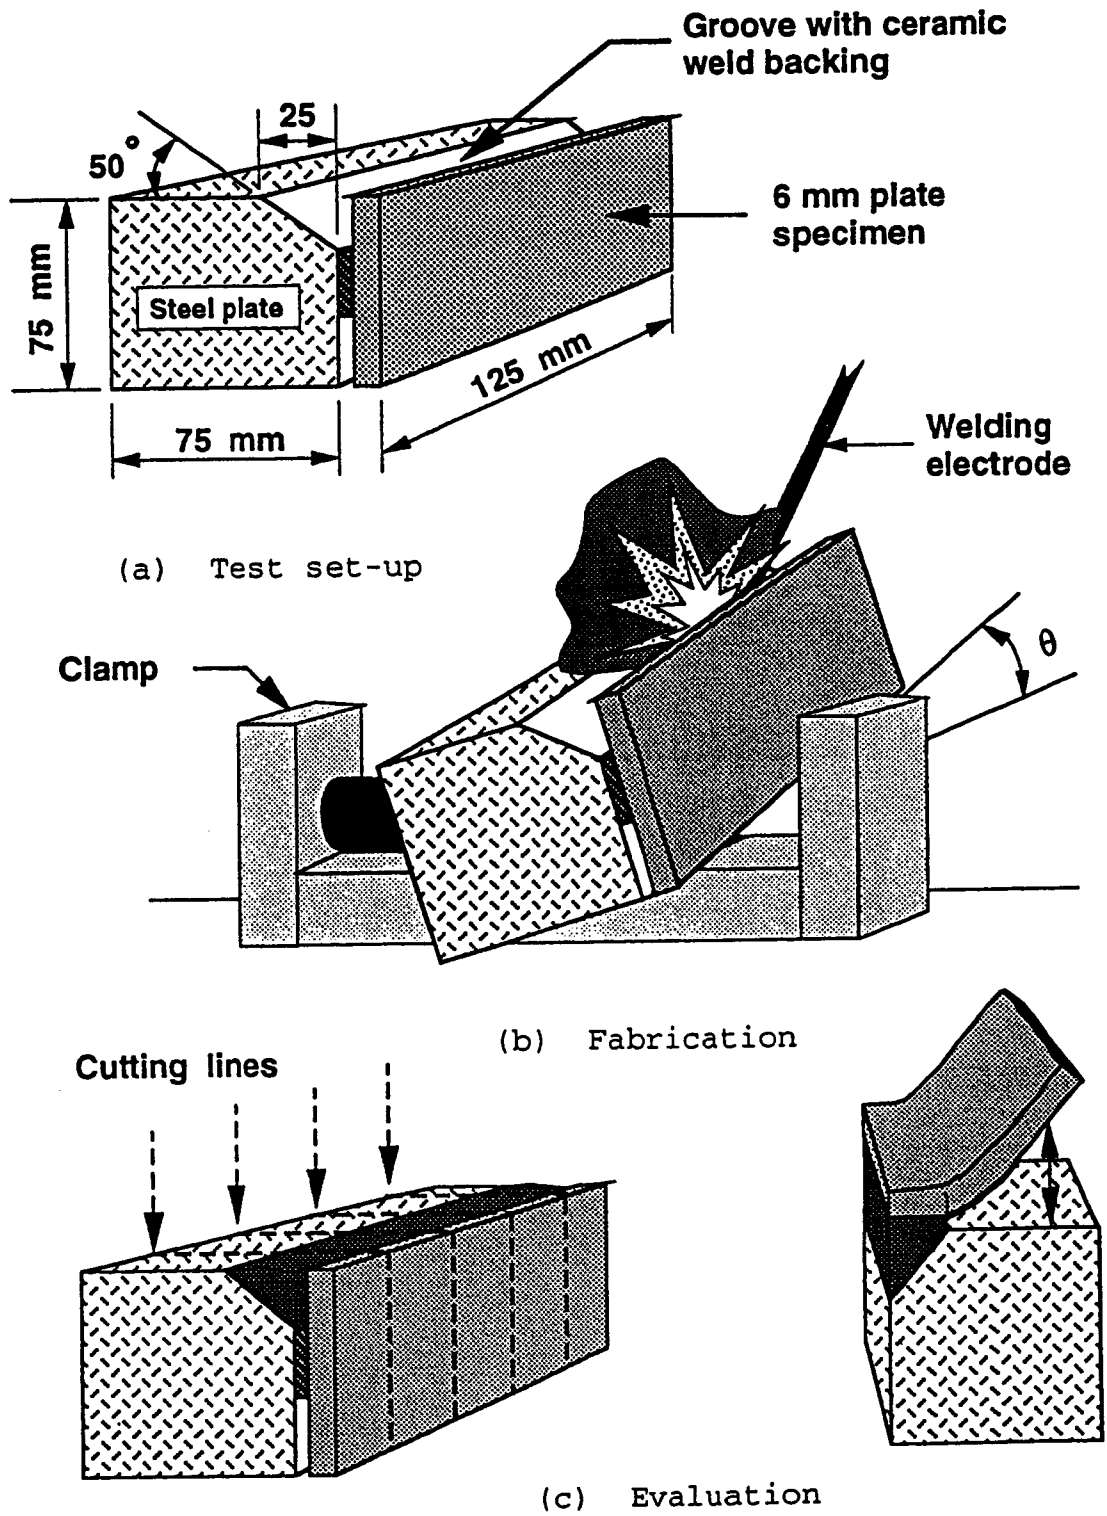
Weld test set-up, fabrication and evaluation
